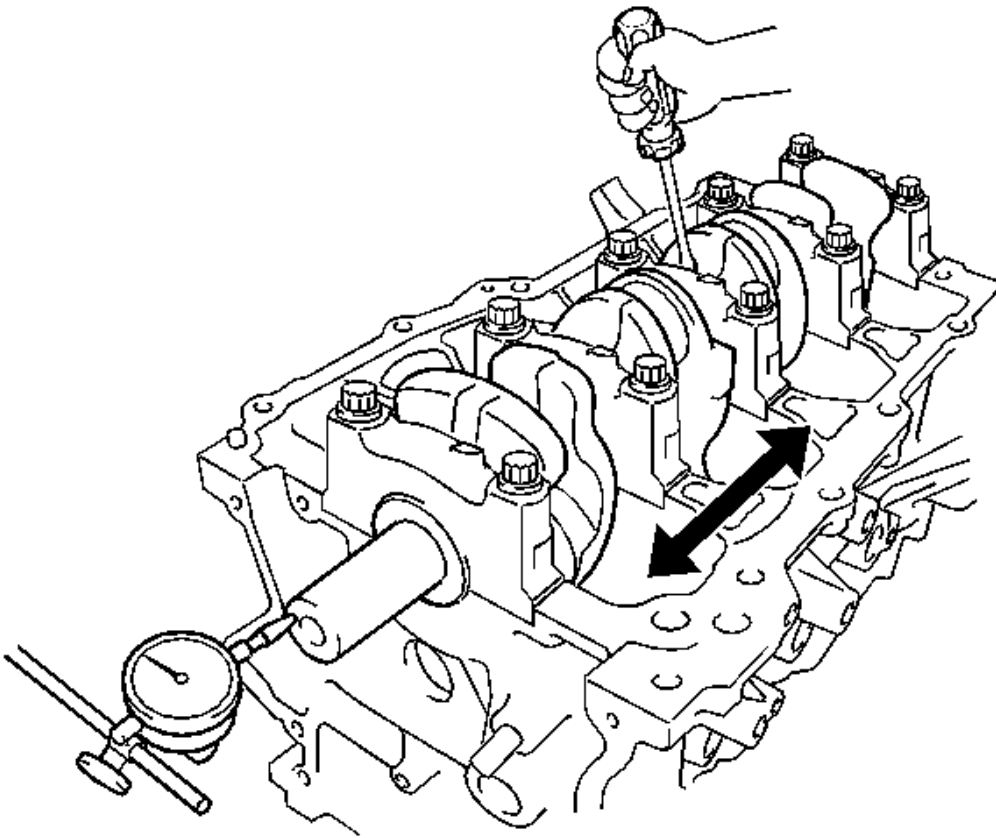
Measuring Thrust Clearance While Prying Crankshaft Back & Forth
